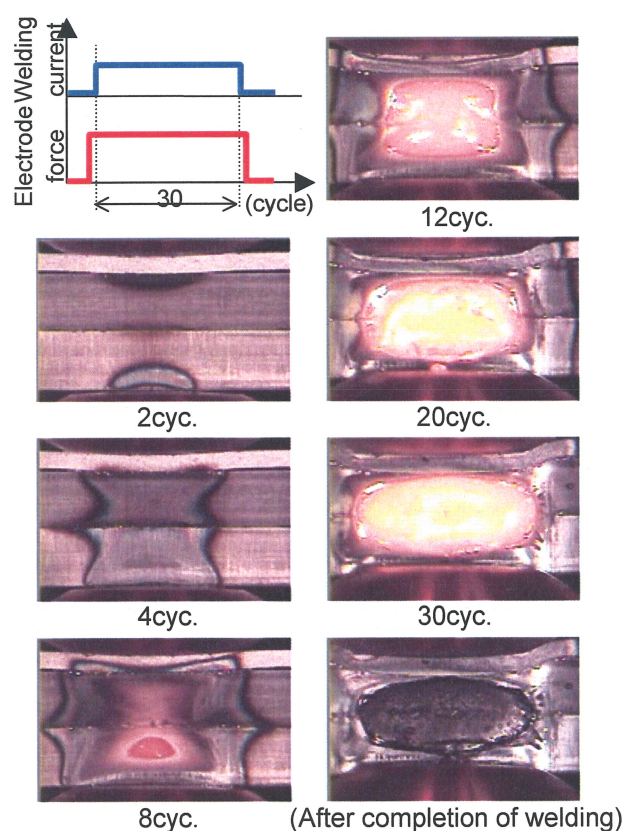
Schematic diagram of current/force control method for welding of three sheet joint and welding process.
